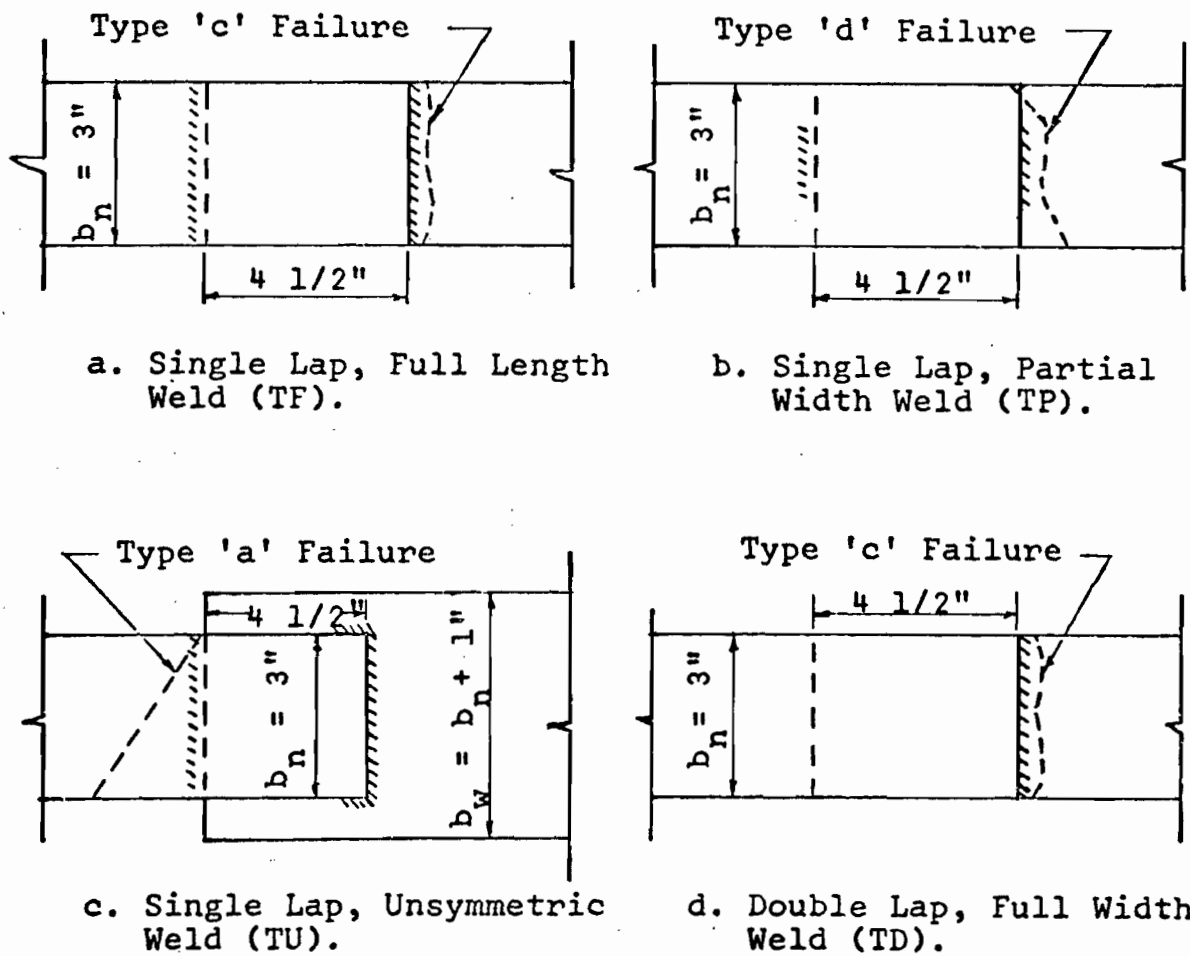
TRANSVERSE FILLET WELD SPECIMENS.
